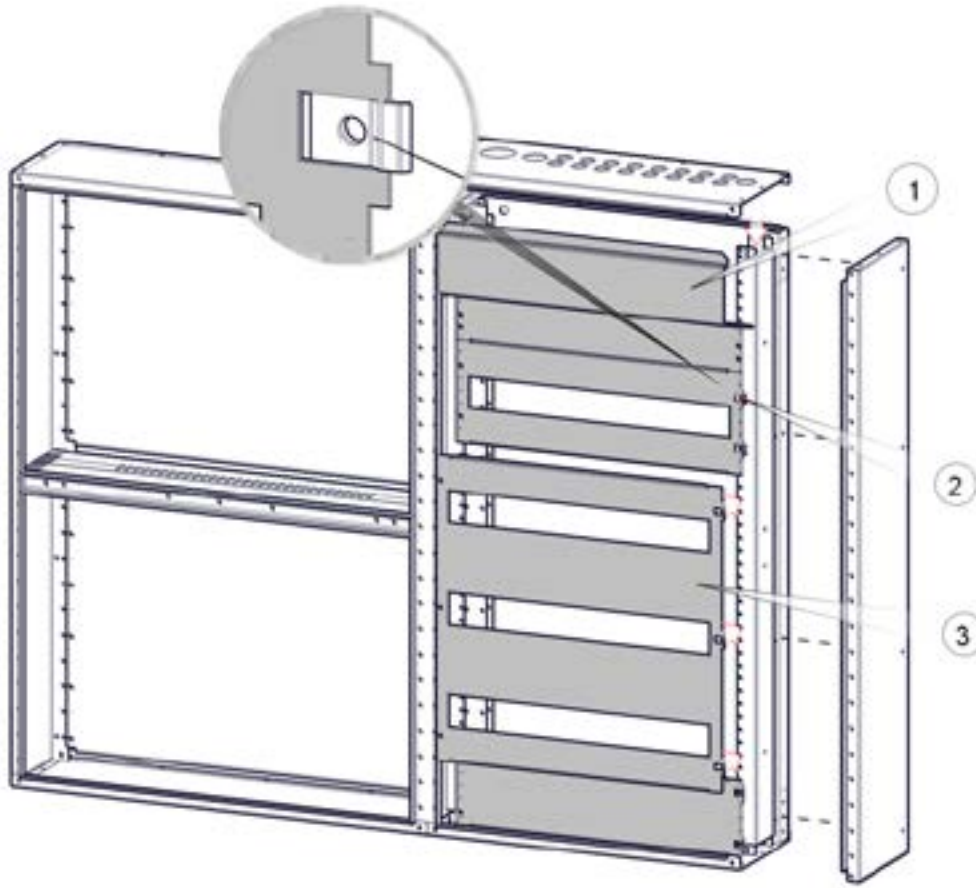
Intermediate cover mountings and their brackets are assembled together and the assembly is then fastened with screws to the L profiles.
